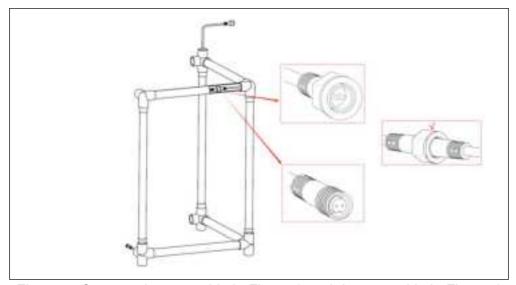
Connect the assembly in Figure 3 and the assembly in Figure 4 together according to the diagram. (Note: Wire first! Tighten with the nuts that came with the wiring.)
